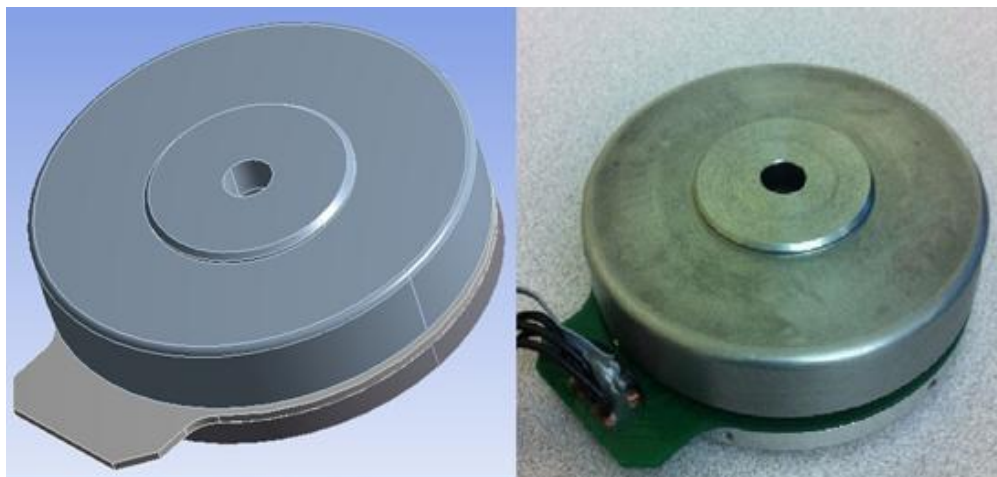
Views of Actual Motor and CAD Motor With and Without Cover
